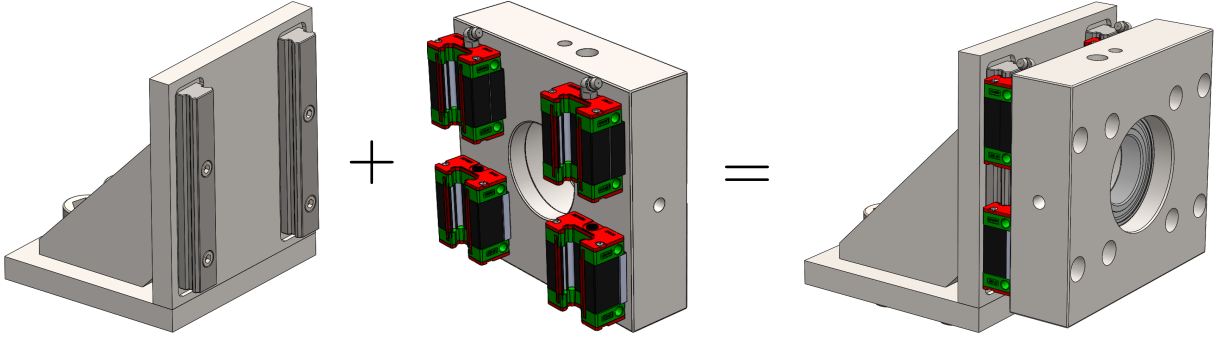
Bracket with linear rolling element bearings connected to the test bearing housing.
